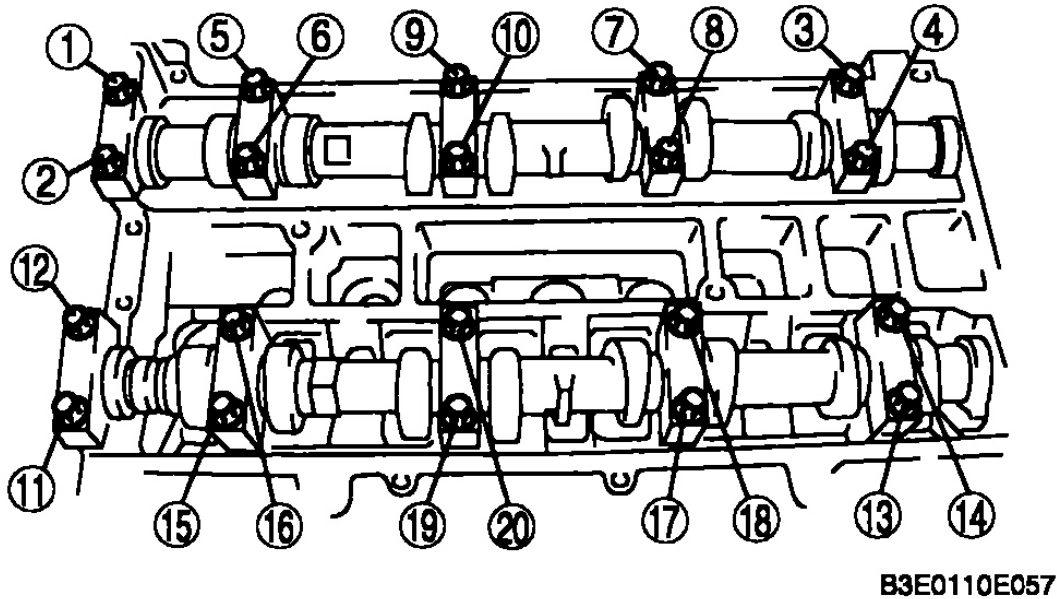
Identifying Loosening Sequence Of Camshaft Cap Bolts
